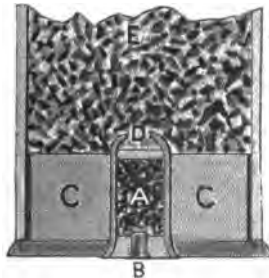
SECTION OF THE BASE OF A 1 1/4-INCH CARTRIDGE CASE FOR A BREECH-LOADING STANCHION-GUN, SHOWING PROPER SYSTEM OF IGNITION
